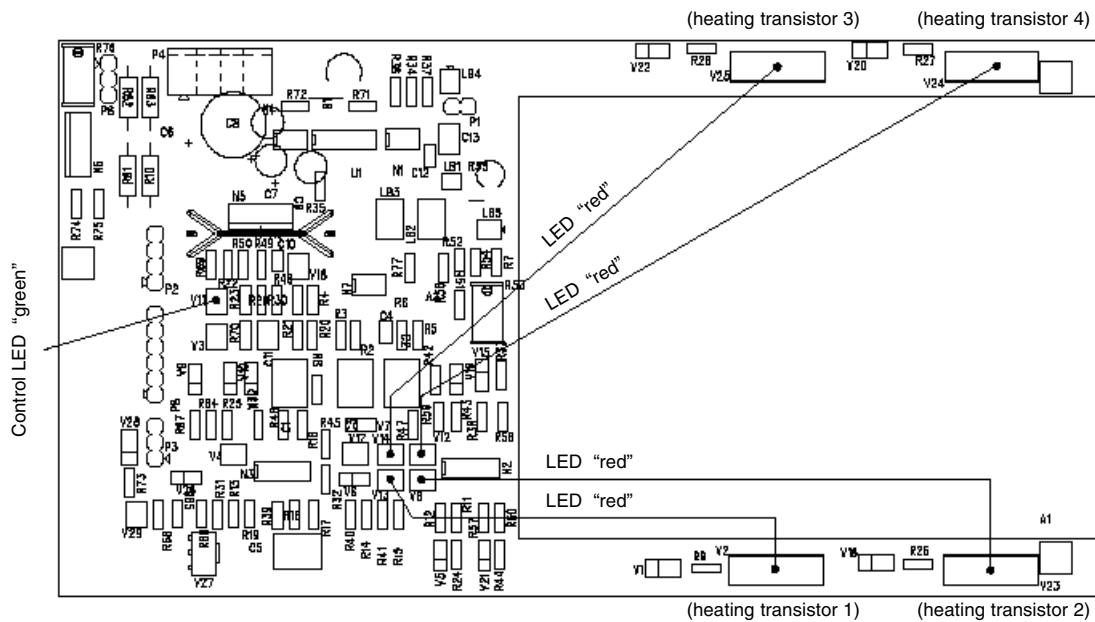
PCB "BHZ" (position of signal LED's / heating transistors)
